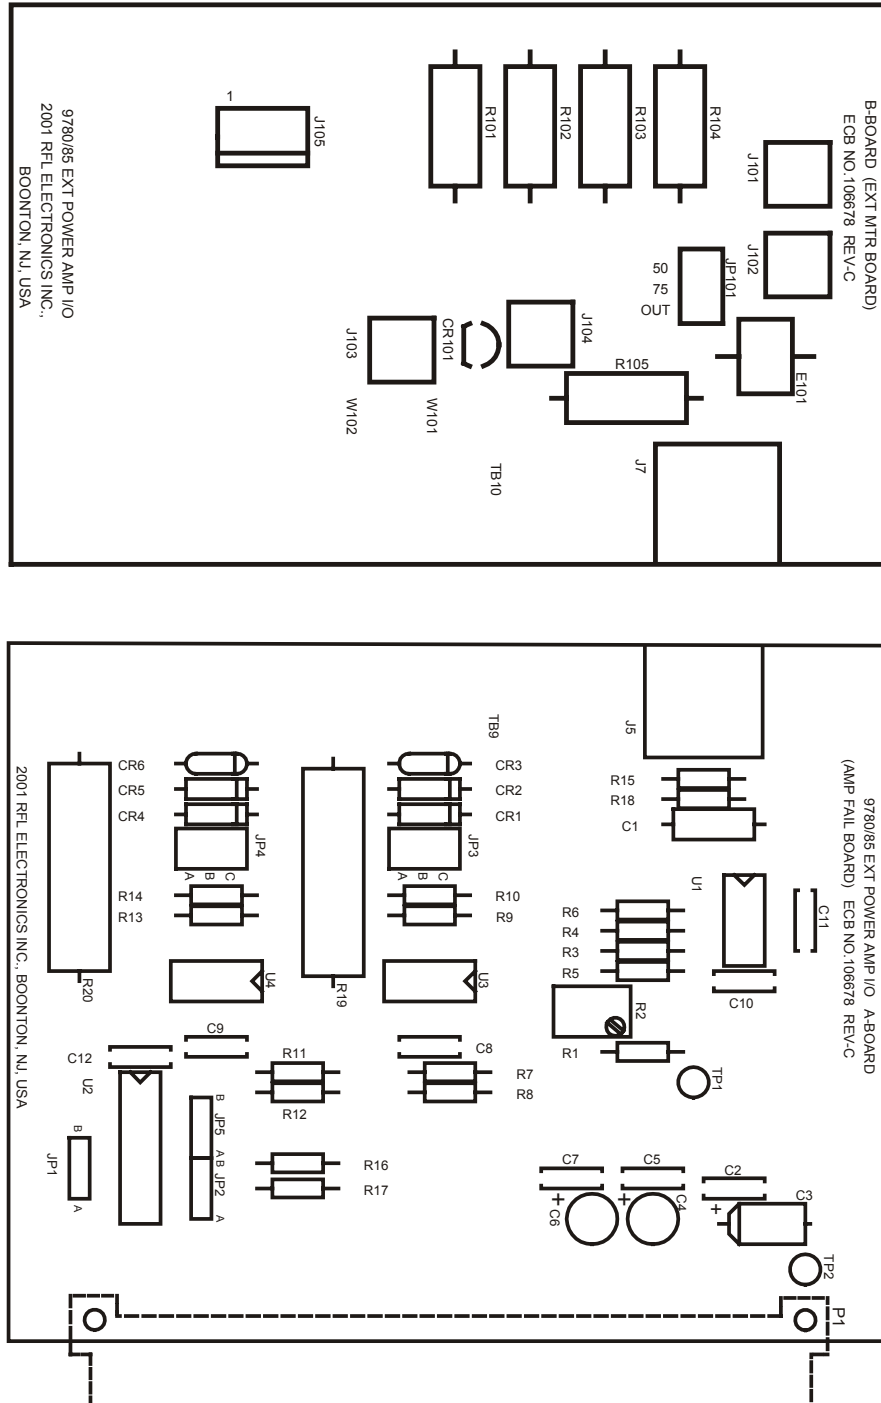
Component locator drawing, External Power Amp I/O module. Assembly No. 106675
